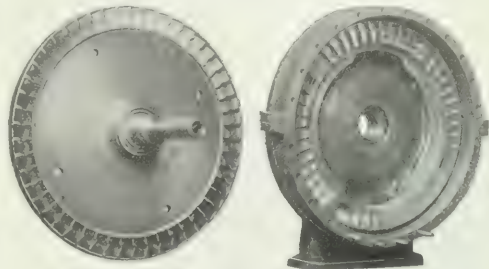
BUCKET-WHEEL, CASING AND REVERSE GUIDE RINGS.
